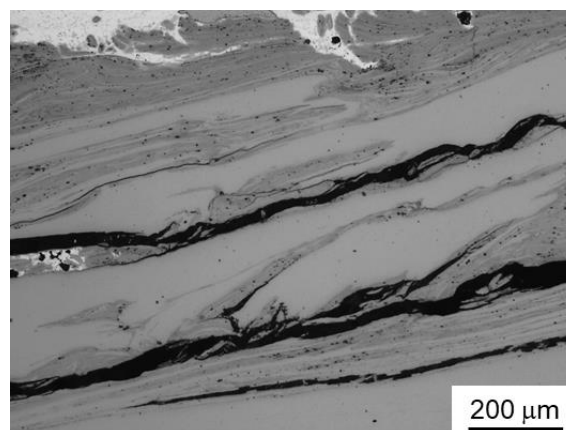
Lamellar structure with cracks inside formed at the interface of the weld 5, produced using a welding speed of 5 mm/s and rotational speed of 1100 rpm.
